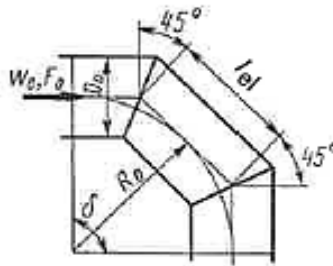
3 elements welded elbow (Idelchik, 1986, p. 302)
